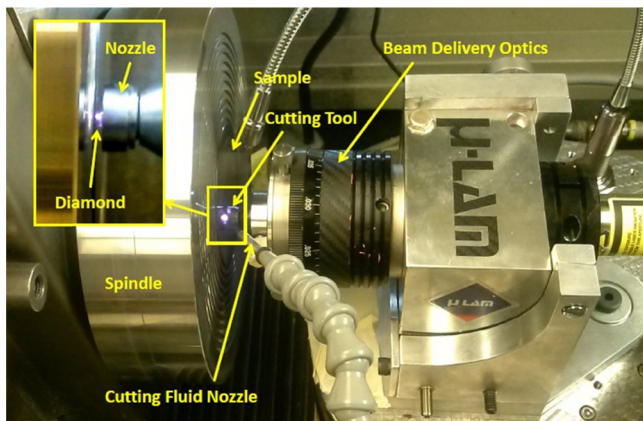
μ -LAM setup mounted on a diamond turning machine.
